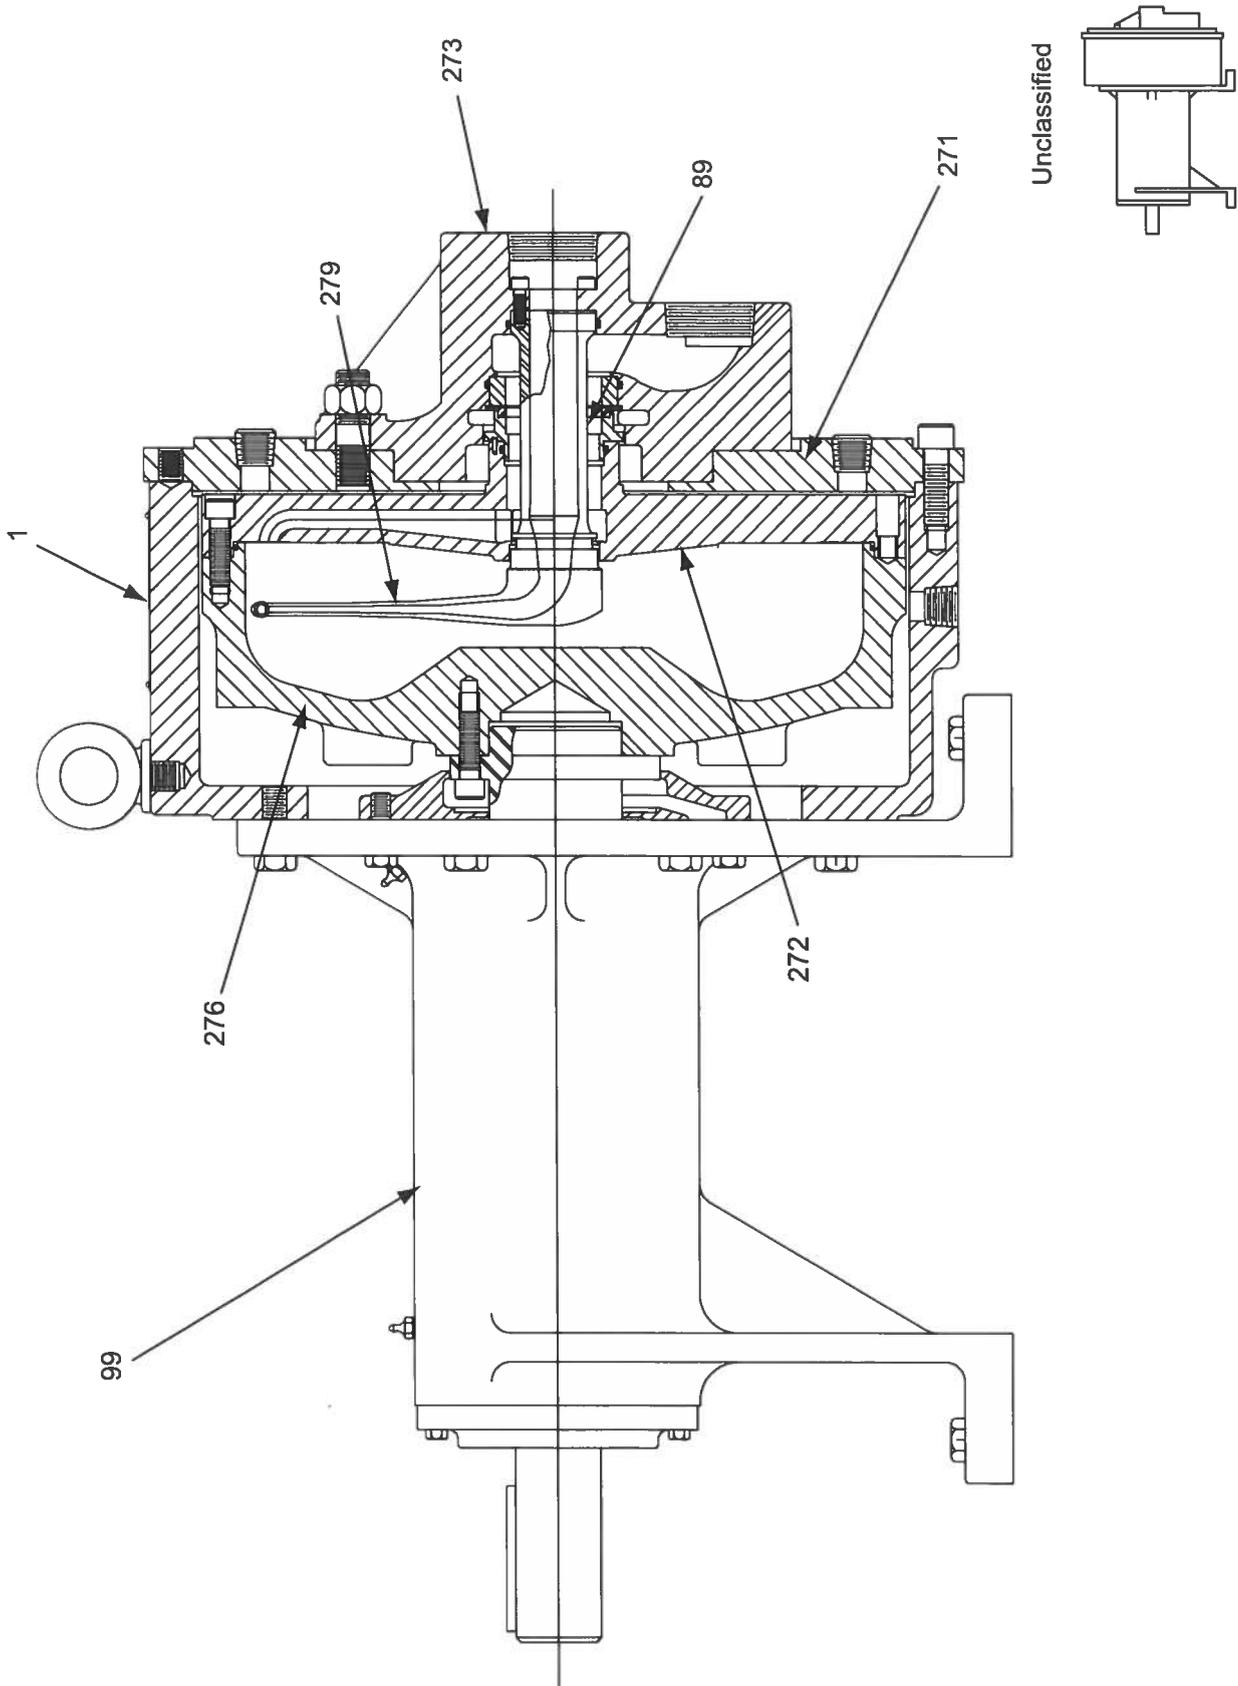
b — Pitot pump — flexibly coupled — single stage — frame mounted
